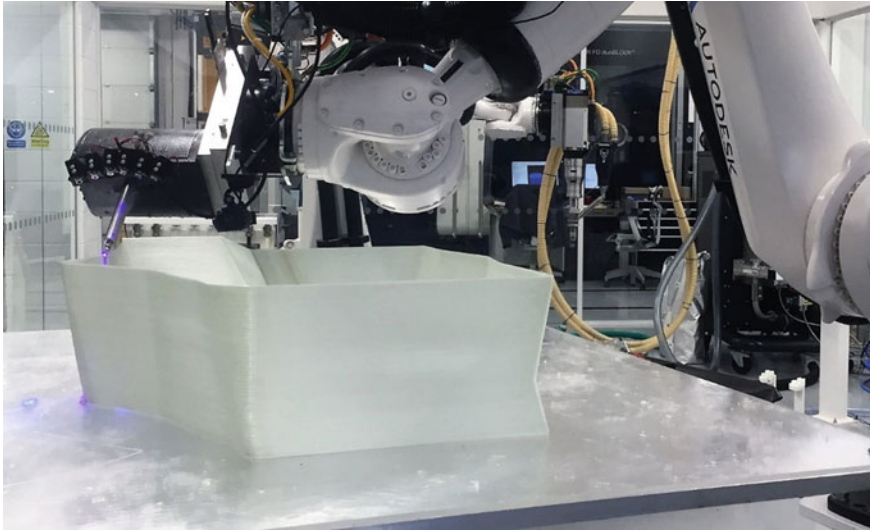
Robot equipped with the CFM technology, printing of one boat section (Courtesy of Moi Composites)
